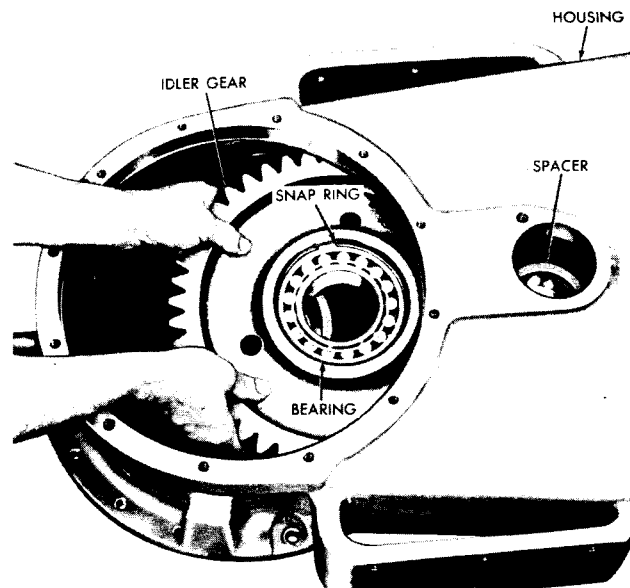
Installing (or removing) transfer idler gear 52435
